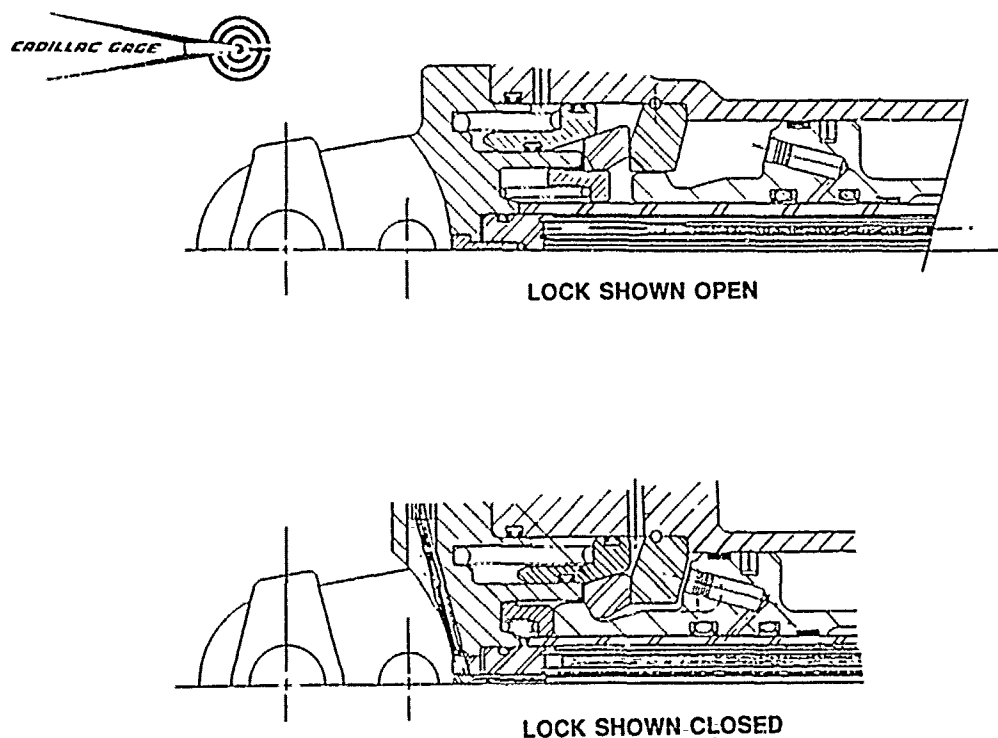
Cadillac Gage - Diffuser Ramp Actuator Lock Mechanism
